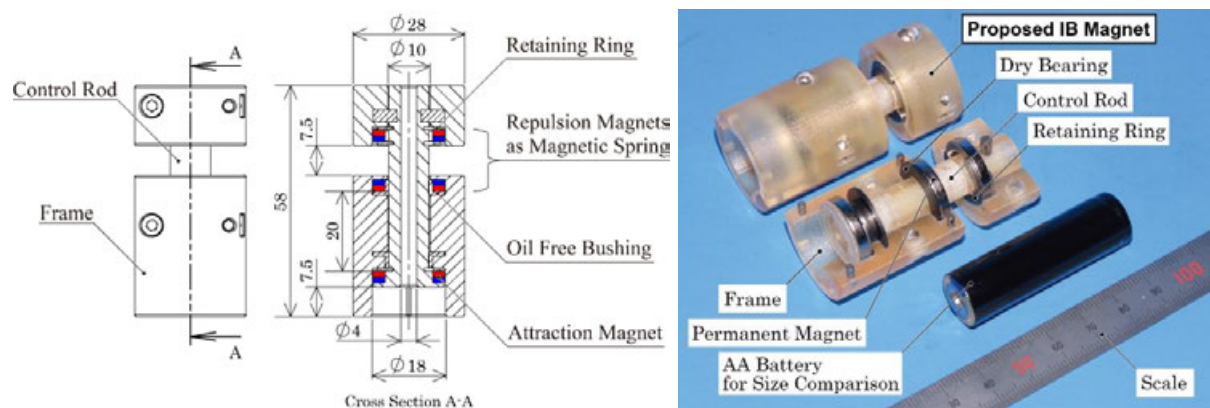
Design and appearance of the prototype of the IB magnet using the magnetic spring.
